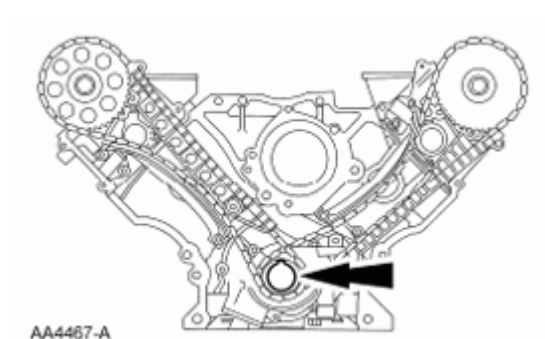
Locating Crankshaft Keyway At 12 O'Clock Position
